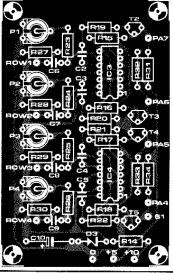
The printed circuit board for the keyboard interface. A footswitch can be wired between S1 of this board and S1 of the display board.
